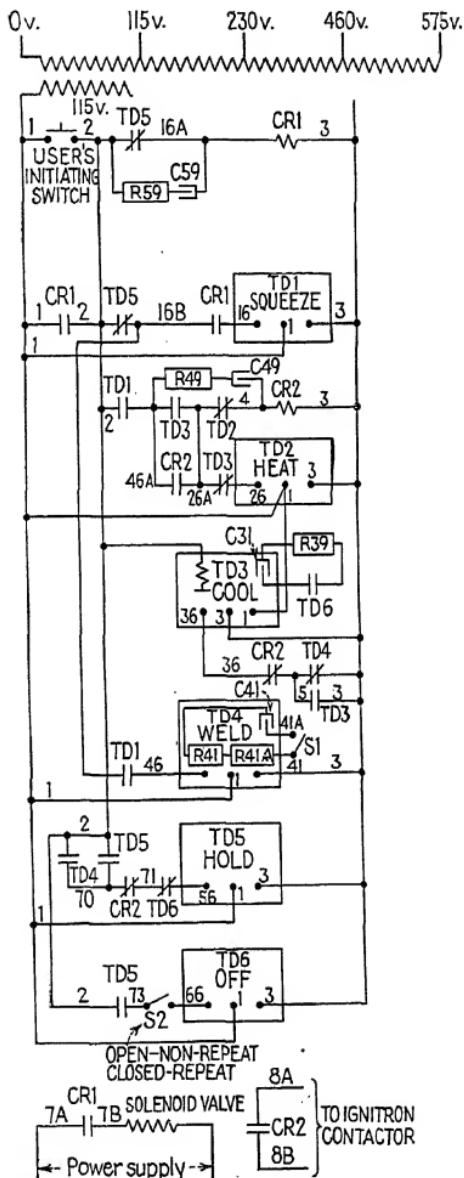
B.—Automatic weld timer for pulsation welding (CR7503-F120).
